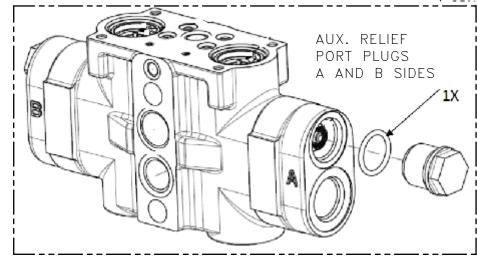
CMA90 WORK SECTION PORT PLUG O-RING  2 PER WORK SECTIONS & 1 PER CONDITIONING VALVE.
